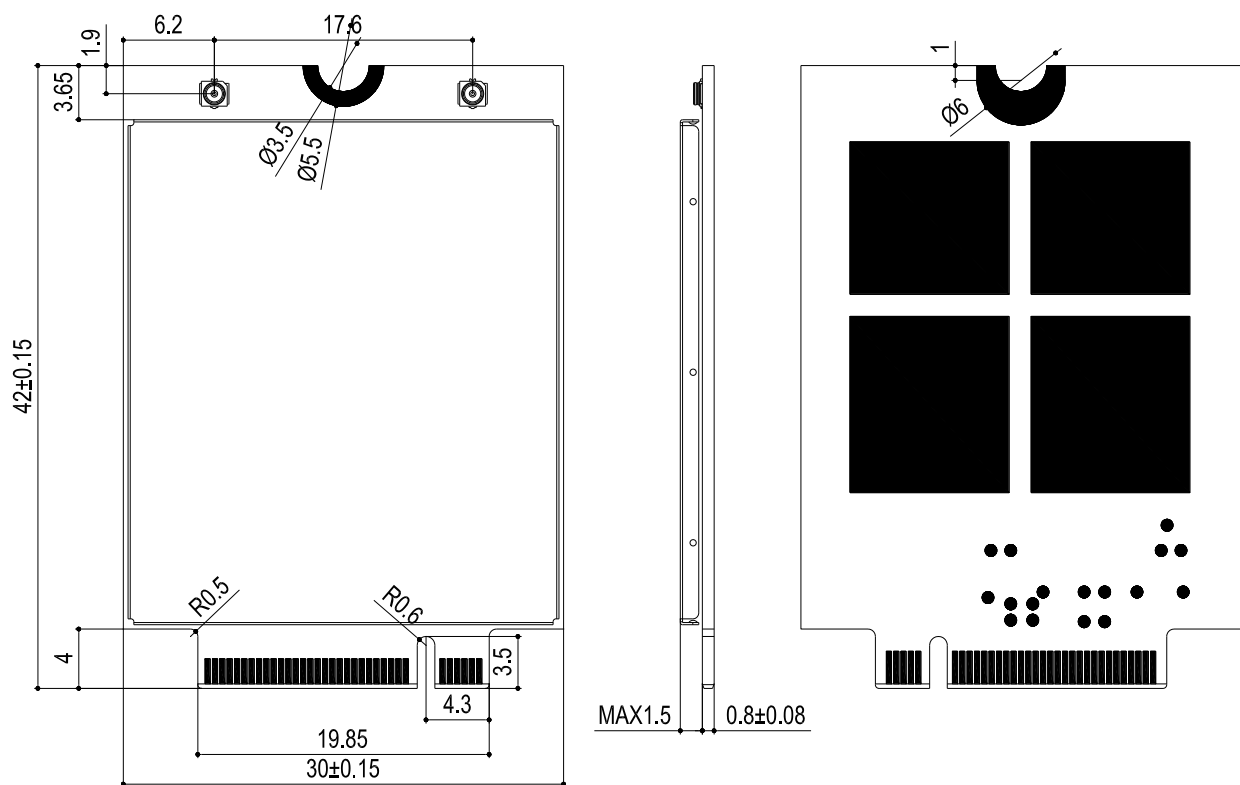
EM060K-GL&EM120K-GL Mechanical Dimensions
